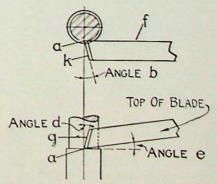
Angles of Box Tool Blades in Relation to Work.
